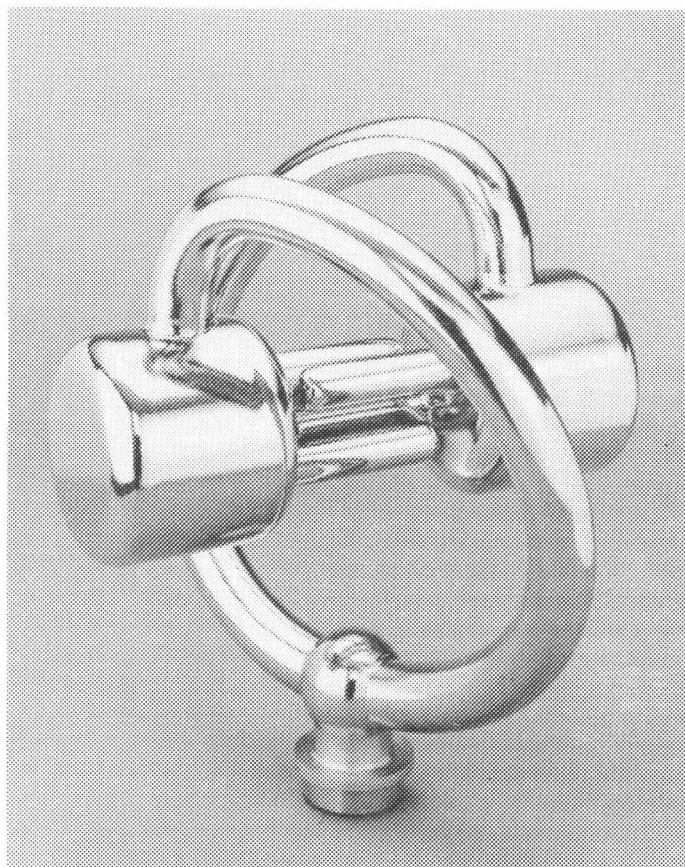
Niobium split-ring assembly with RFQ vanes prior to being welded into the outer housing.
